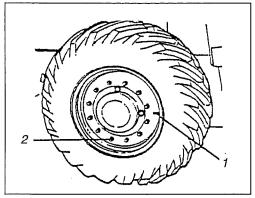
Wheel 1 Air valve 2 Wheel nut
